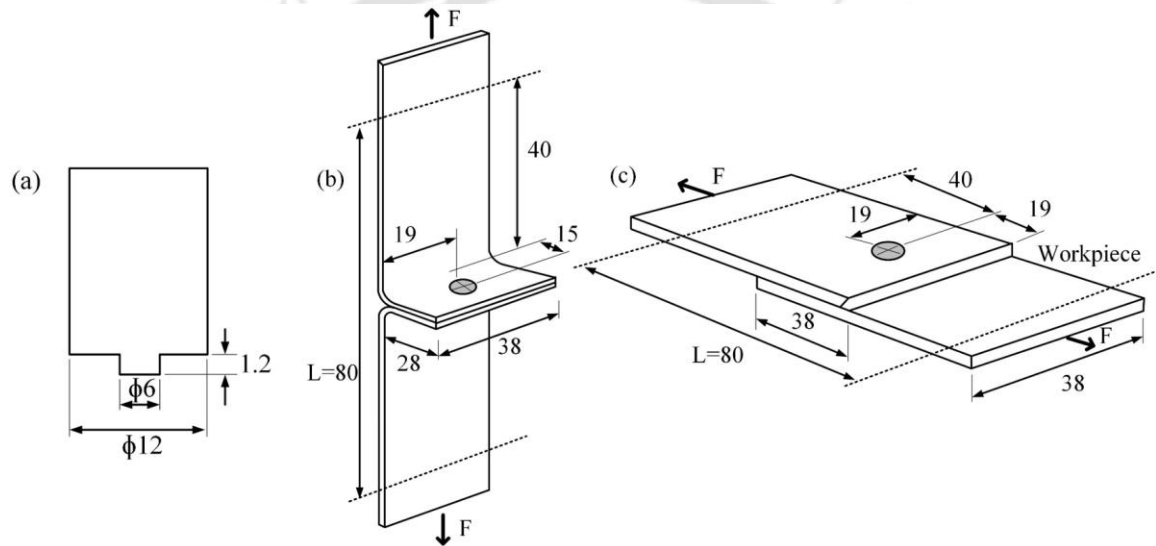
Schematic diagrams: (a) FSW tool with dimensions (b) peel test sample (b) lap shear test sample (all dimensions are in mm; L is the gripping length; F is the force applied by UTM)
